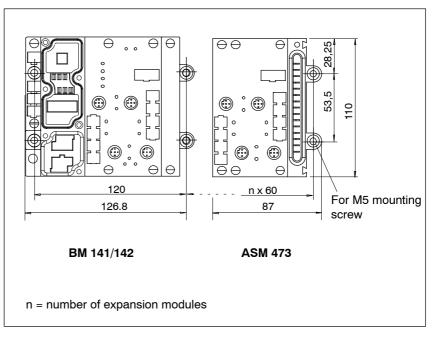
Dimensions for mounting holes for basic and expansion modules
